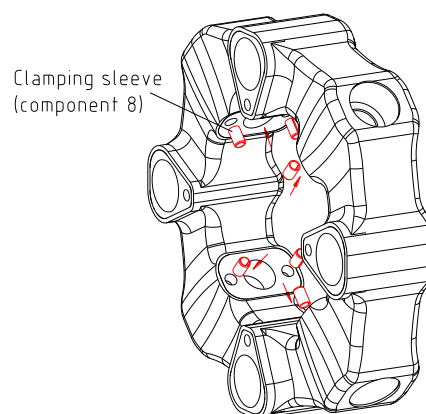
Type EP - Assembly of clamping sleeves (component 8)
